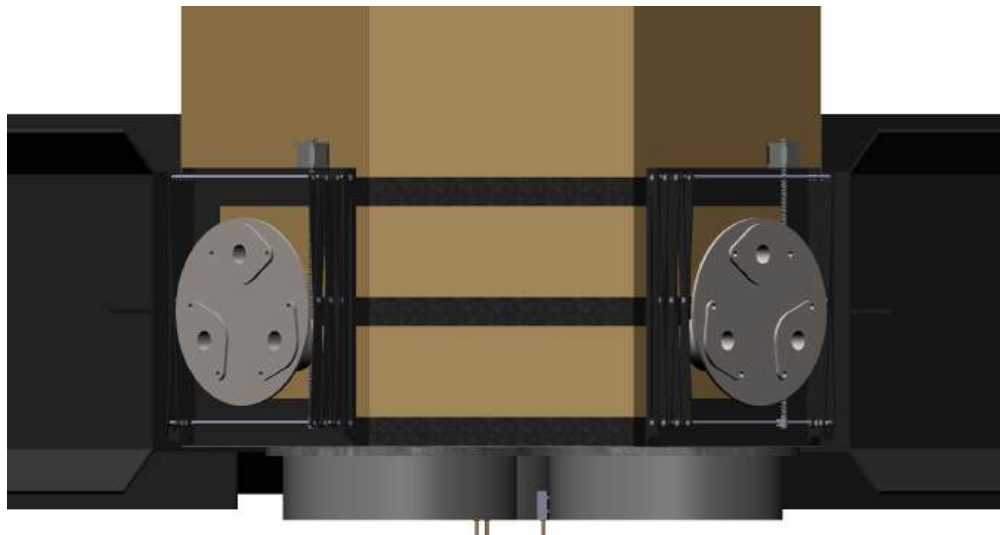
Scuttle MK2: ASRG launch mounting plate and HDMR female ends.
